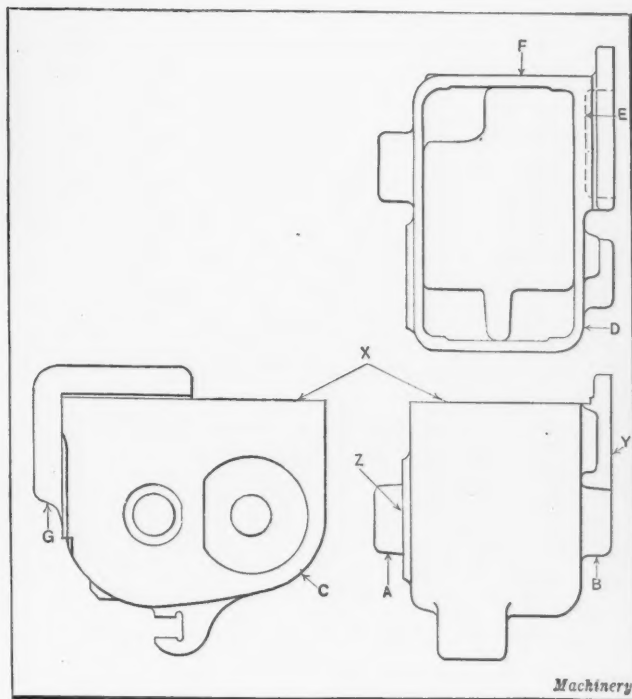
Outline of Gear-box planed in Fixture shown in Fig. 9
